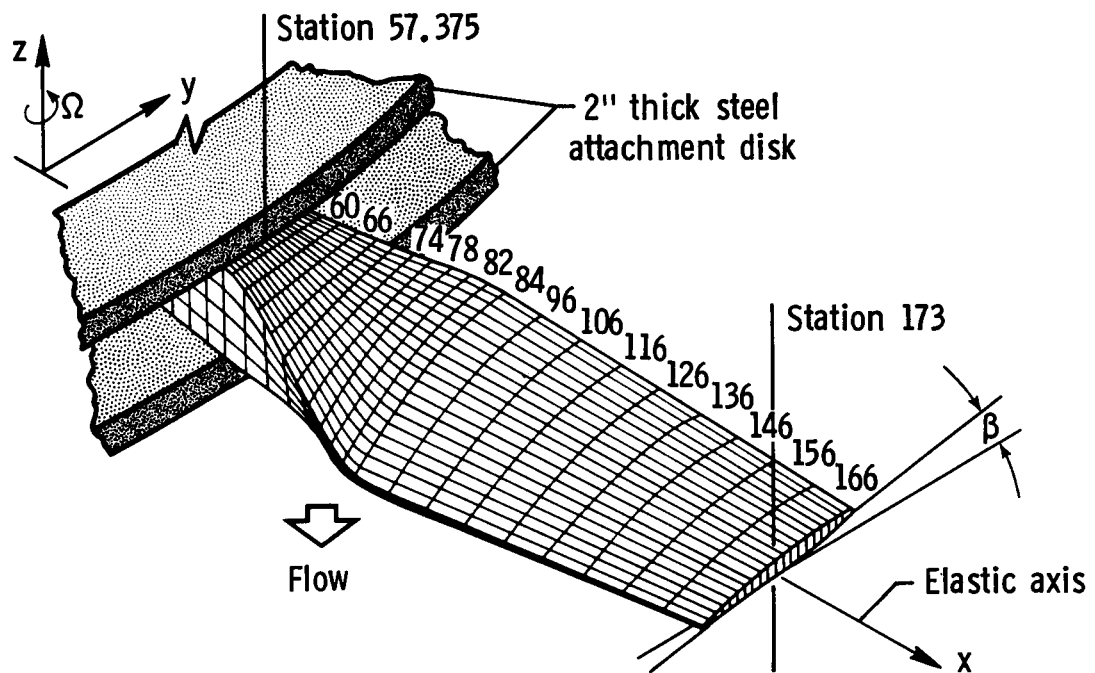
7- by 10-Foot Wind Tunnel fan blade
